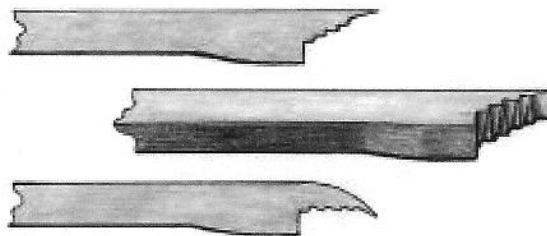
Top- shouldered and stepped scarf. Bottom- Curved tip. Shoulder prevents scarf from overlapping beyond upset area when scarfs are quickly placed together.
